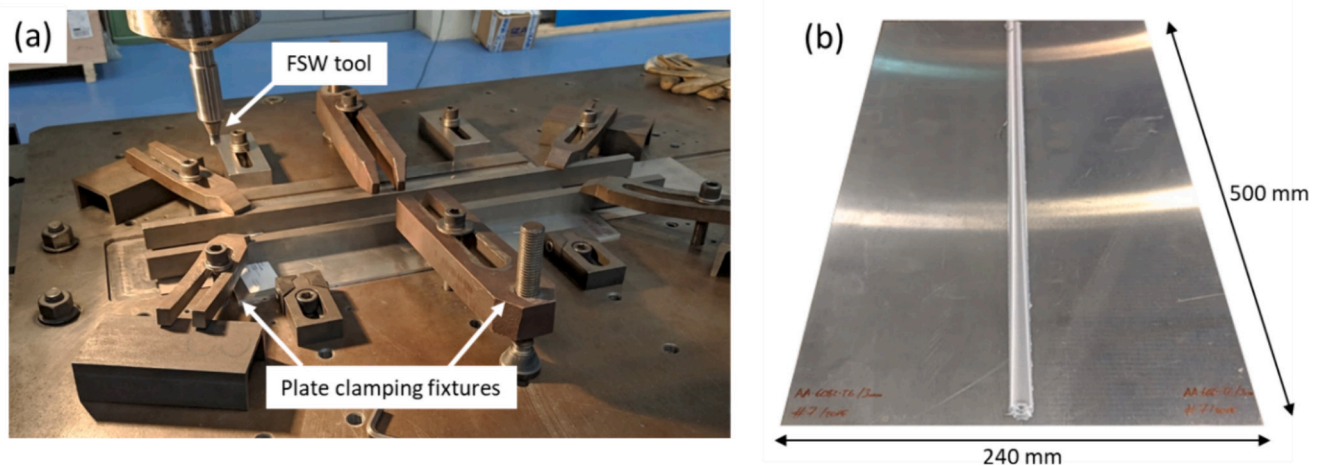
(a) Bench of the vertical milling machine used for friction stir welding, FSW tool and plate clamping fixtures. (b) Image of one of the manufactured butt joints.
